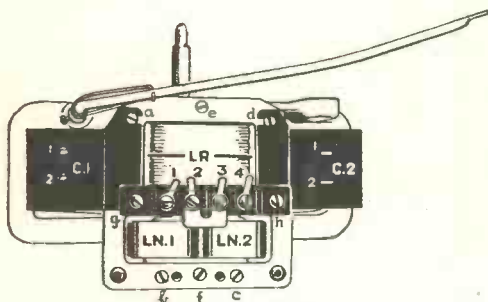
THE COILS AND CONDENSERS OF THE H.M.V. TYPE 24 MOTOR.
